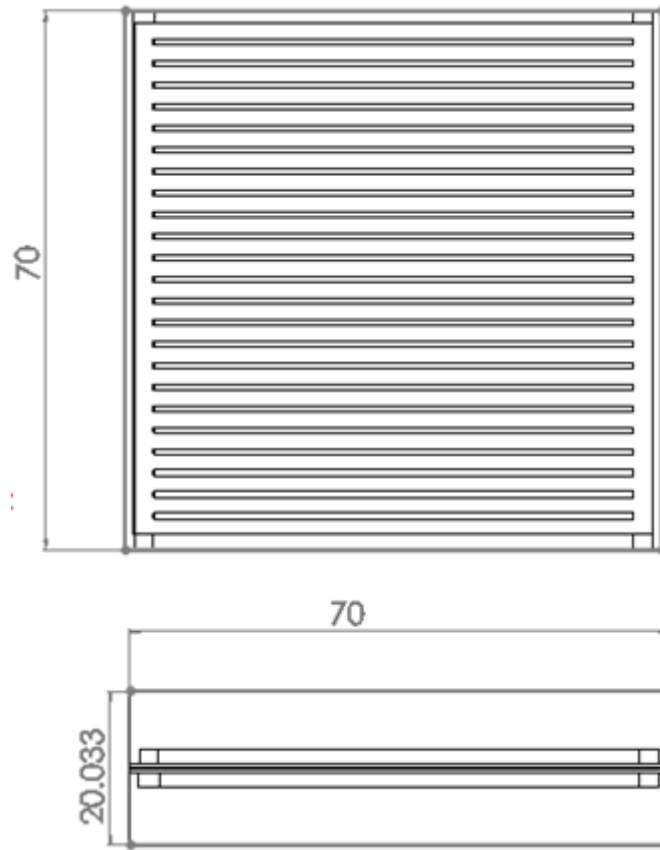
Parallel geometry overall dimensions. Displayed units in mm
